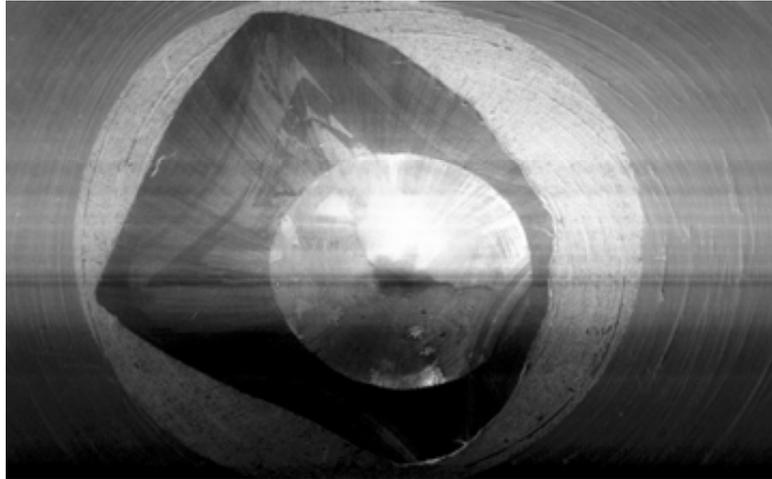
Machined conical surface of a Rockwell-diamond-indenter
